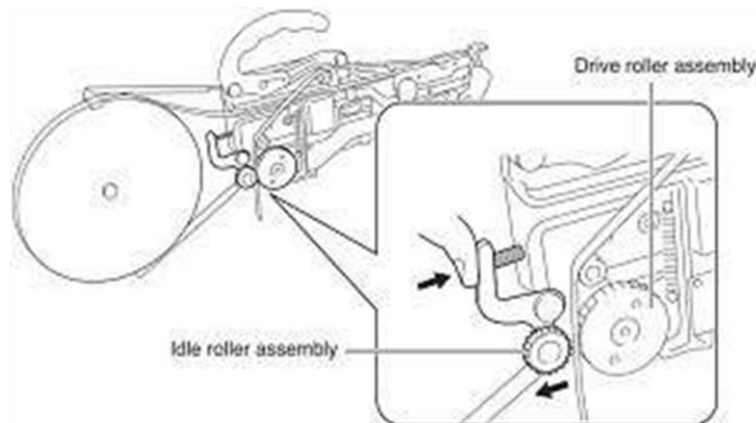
Drive roller assembly and idle roller assembly
